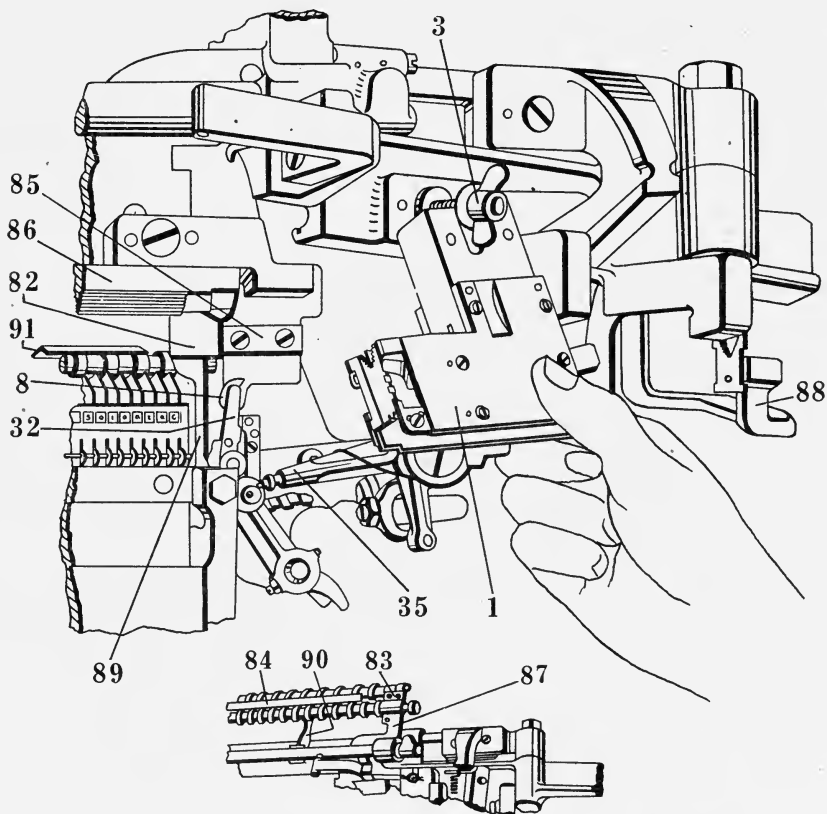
The Mixer Distributor Box 1 may be taken from its seat on the swinging arm by loosening the wing nut 3. After stopping the distributor, trip the clutch to throw the feeler points and lifts clear of the box lower rails, retract the shifter 88, raise the rear conveyor screw bracket 87 and lower the cam lever 35. It will be noticed that the lift 32 and the cam lever 35 do not form a part of the distributor box 1, but are mounted separately in a bracket below the box.
